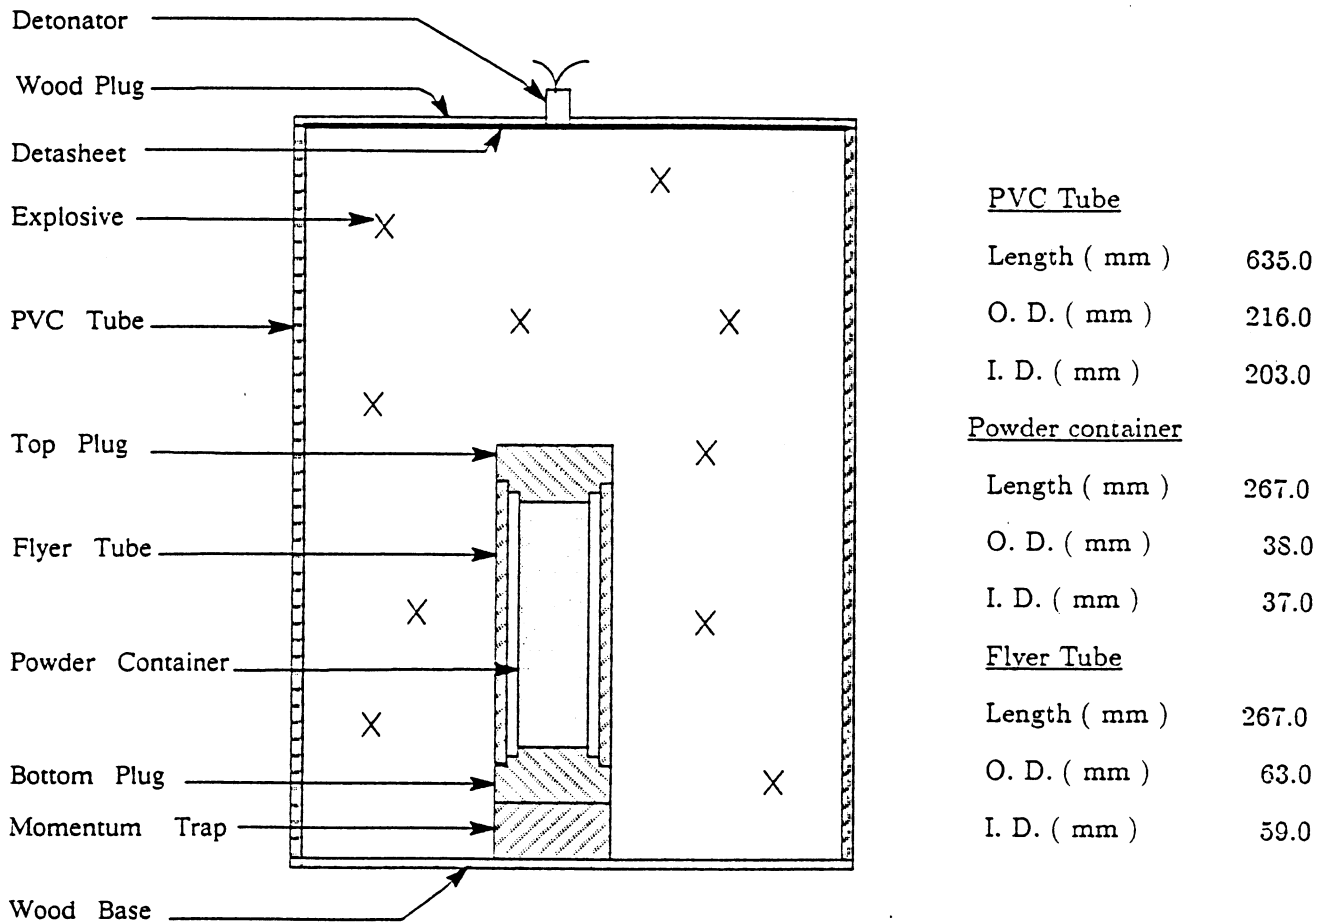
Cylindrical axisymmetric double-tube system and its experimental dimensions for cylindrical geometry.
